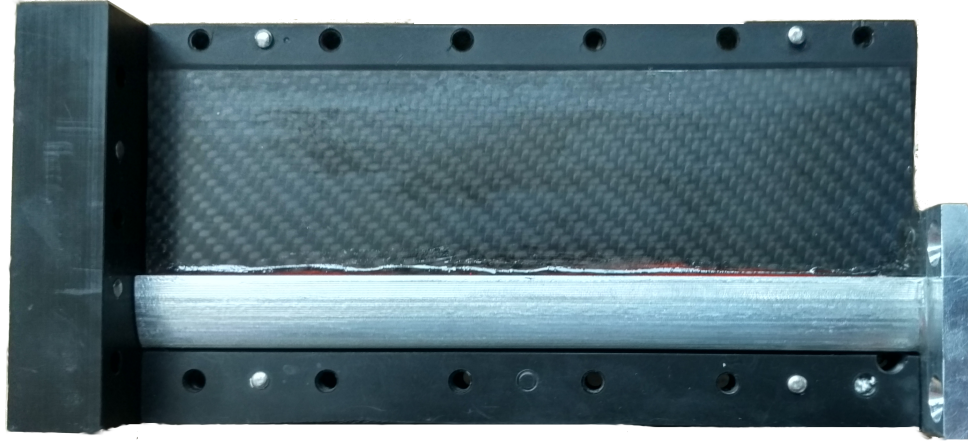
The aluminum milled head flexible hydrofoil with bonded carbon composite plate in the opened casting mold
